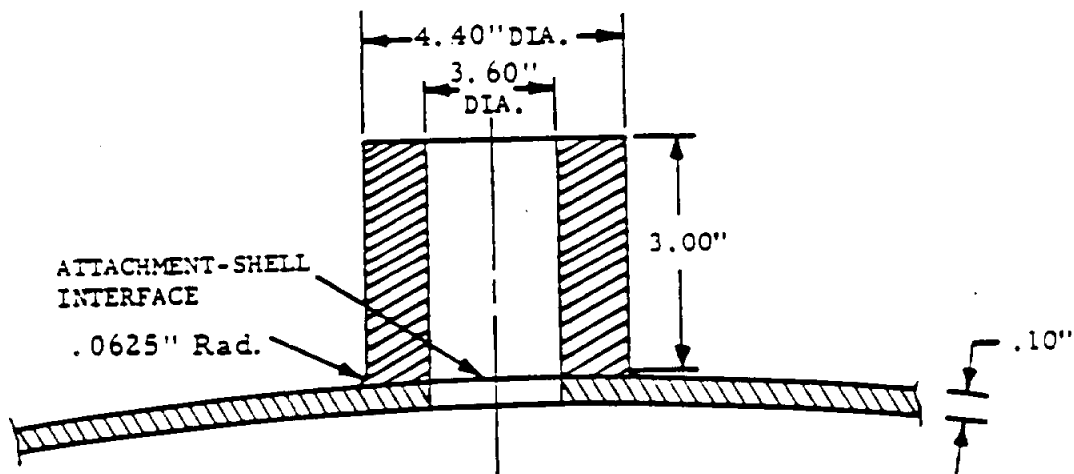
Welded Hollow Attachment (Detail A)
